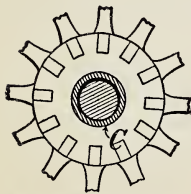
Section through a carriage hub, showing an ordinary bearing.
